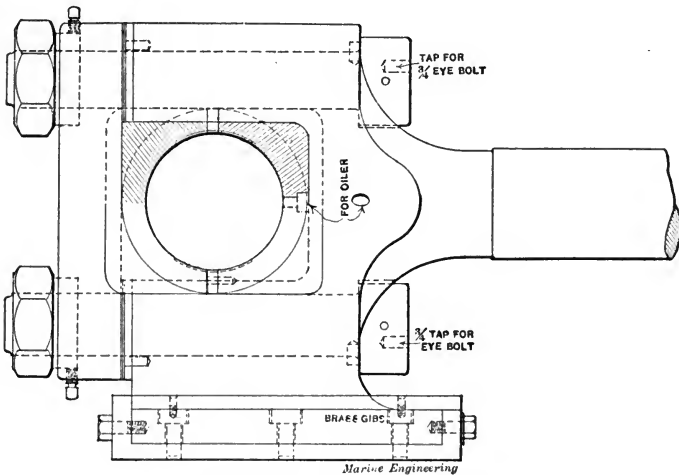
Crosshead formed on Lower End of Piston Rod.
